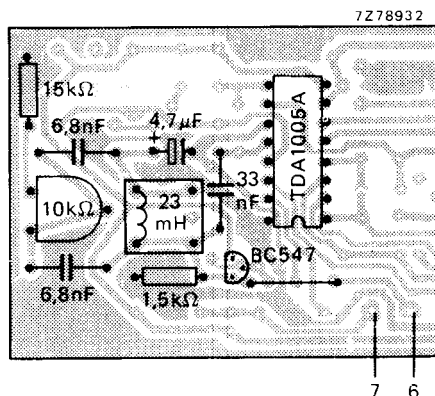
Printed-circuit board component side, showing component layout of Fig. 19.
